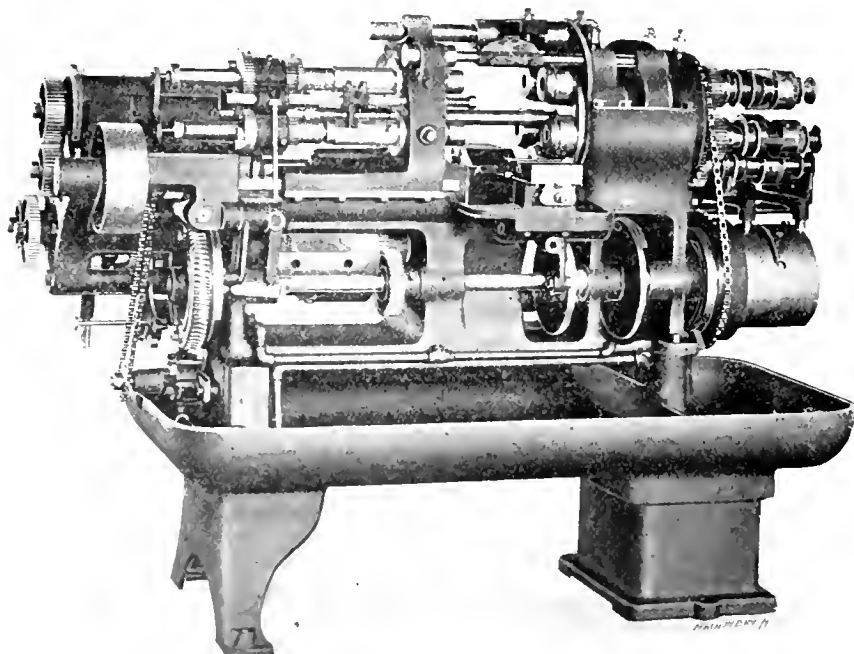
Rear View of Machine, showing Oscillating Tool Holder
